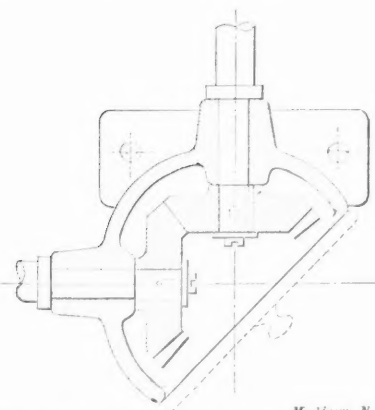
Miter Gear Guard, with the Guard and the Bearing for the Shaft cast in One Piece.
